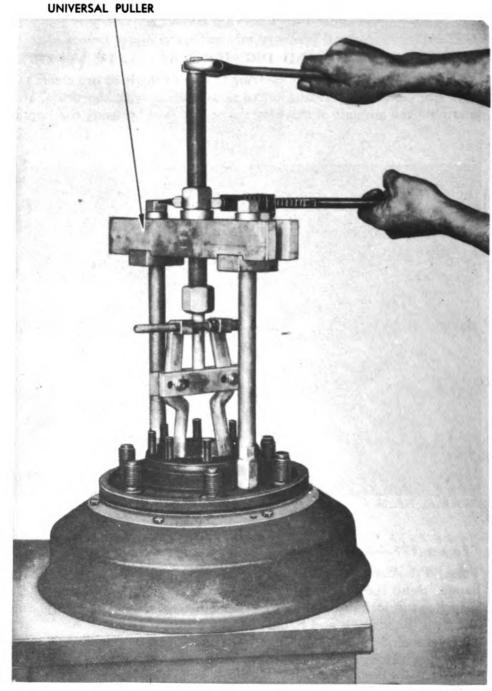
Removing Front Wheel Inner Bearing Cone (6 x 6)
